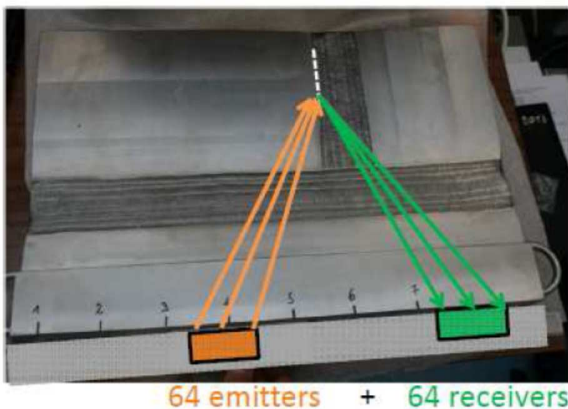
Under water test configuration for vertical welded joint inspection with two 64 element sensors (focused wave case)
